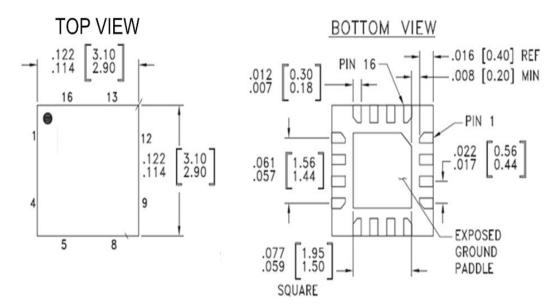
Outline Drawings of QFN (16pin, 3x3mm) Package [Dimensions in mm]
